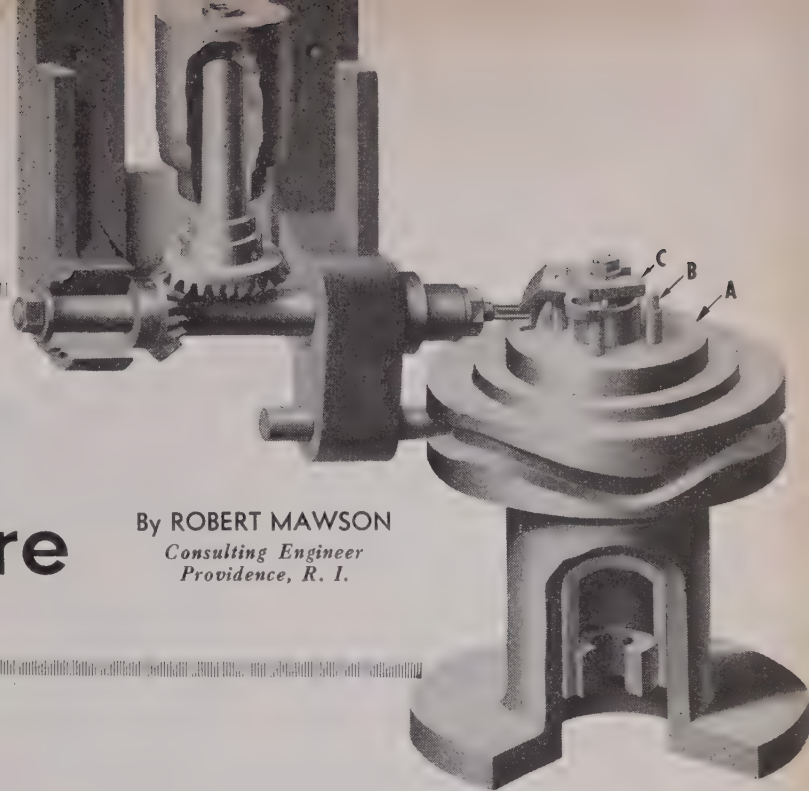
The fixture for holding the cam during milling is shown at right, and the adaptation of the milling machine itself is shown at left. The spindle of the machine drives the gear train that drives the cutter, and the entire spindle-bracket detail follows the path of the cam guide pin as it traces the path in the fixture.
